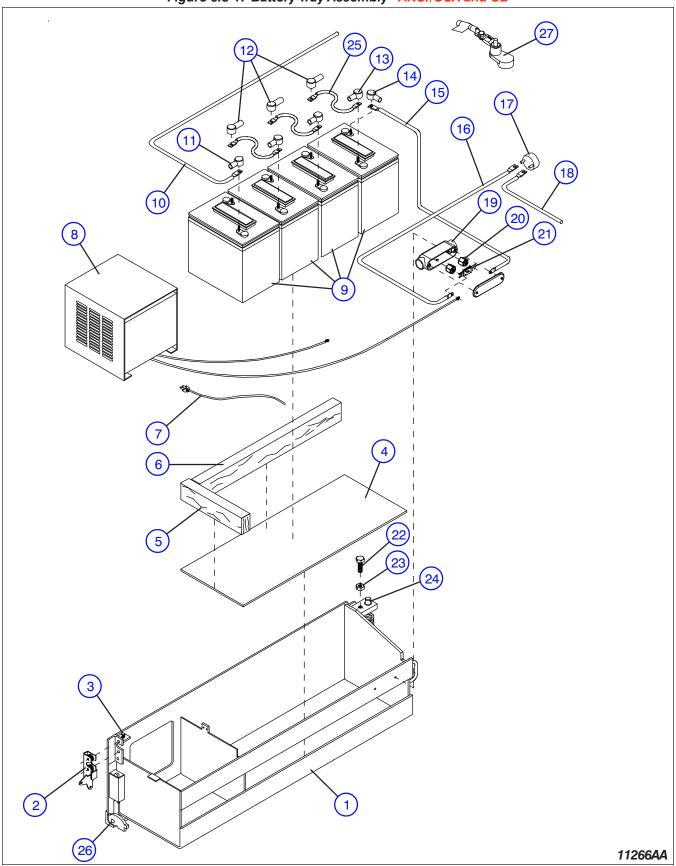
Battery Tray Assembly - ANSI/CSA and CE
